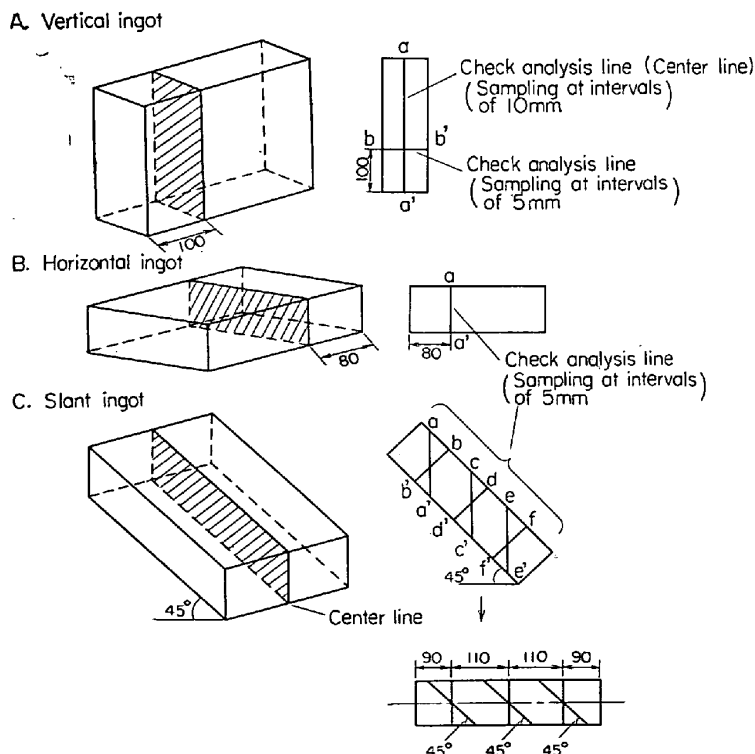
Cutting places of steel ingots and check analysis positions of chemical elements.
